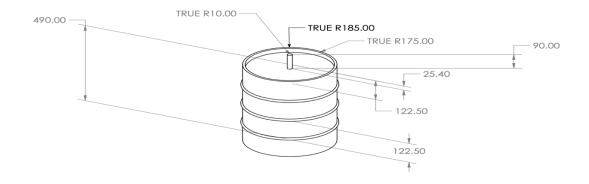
Dimensioned 3D SolidWorks Model of External
